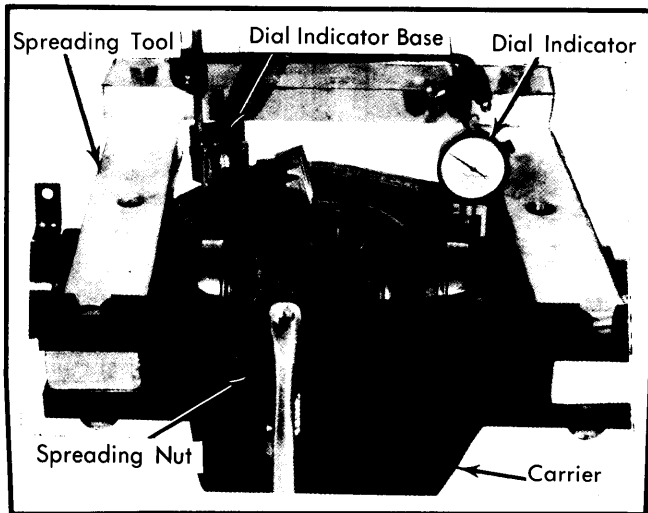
Spreading Differential Carrier. Mount Spreading Tool and Dial Indicator. Turn Spreading Nut Until Carrier Spread Reaches Maximum of .010".
